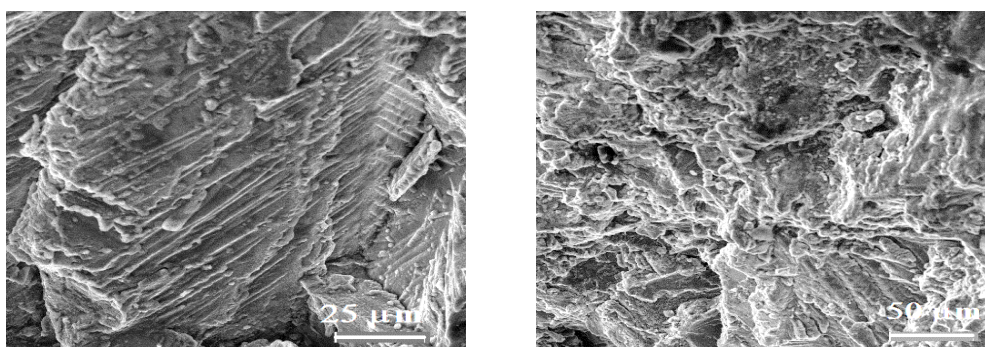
,b Fatigue fracture character and ductile nature of the fracture
